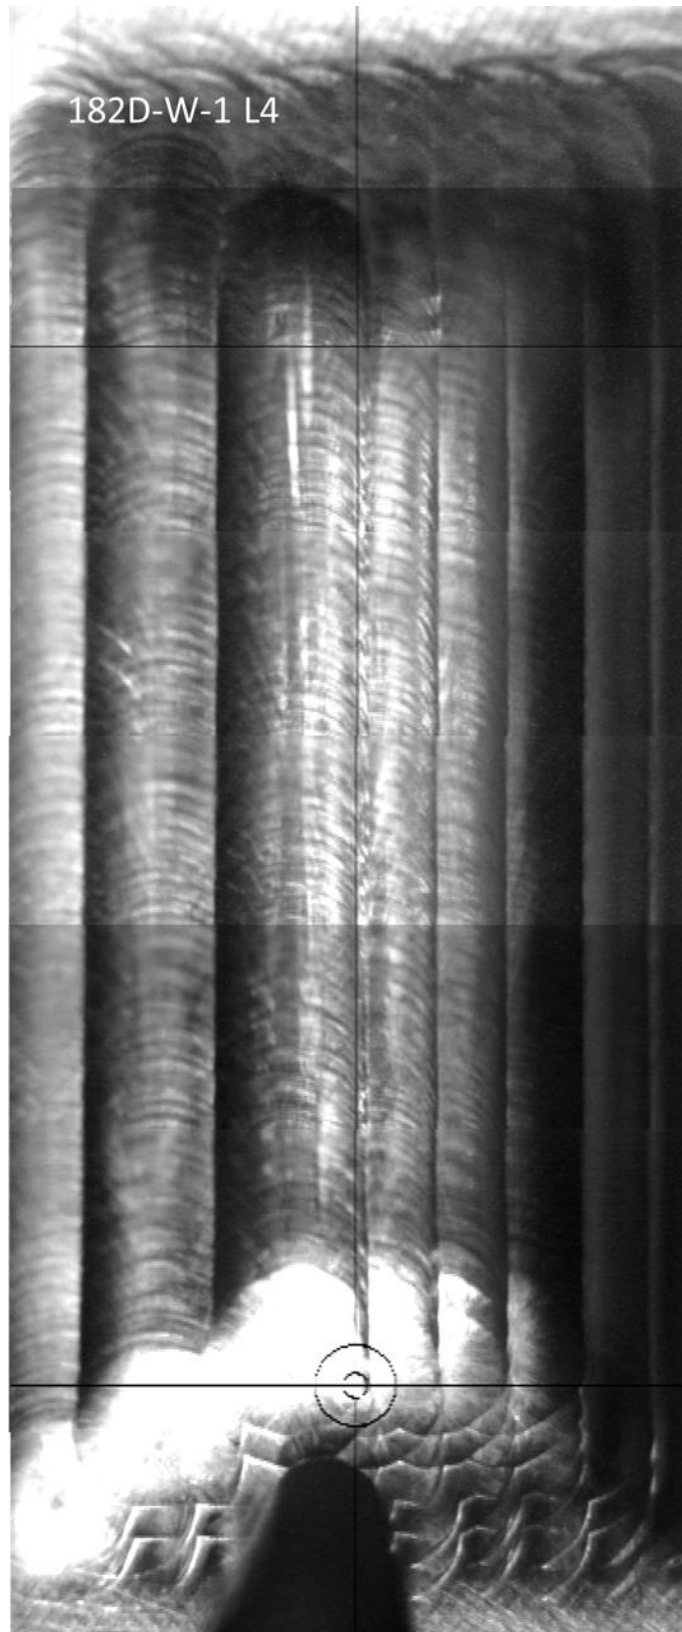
Initial surface inspection of the welded Alloy 182 coupons.
